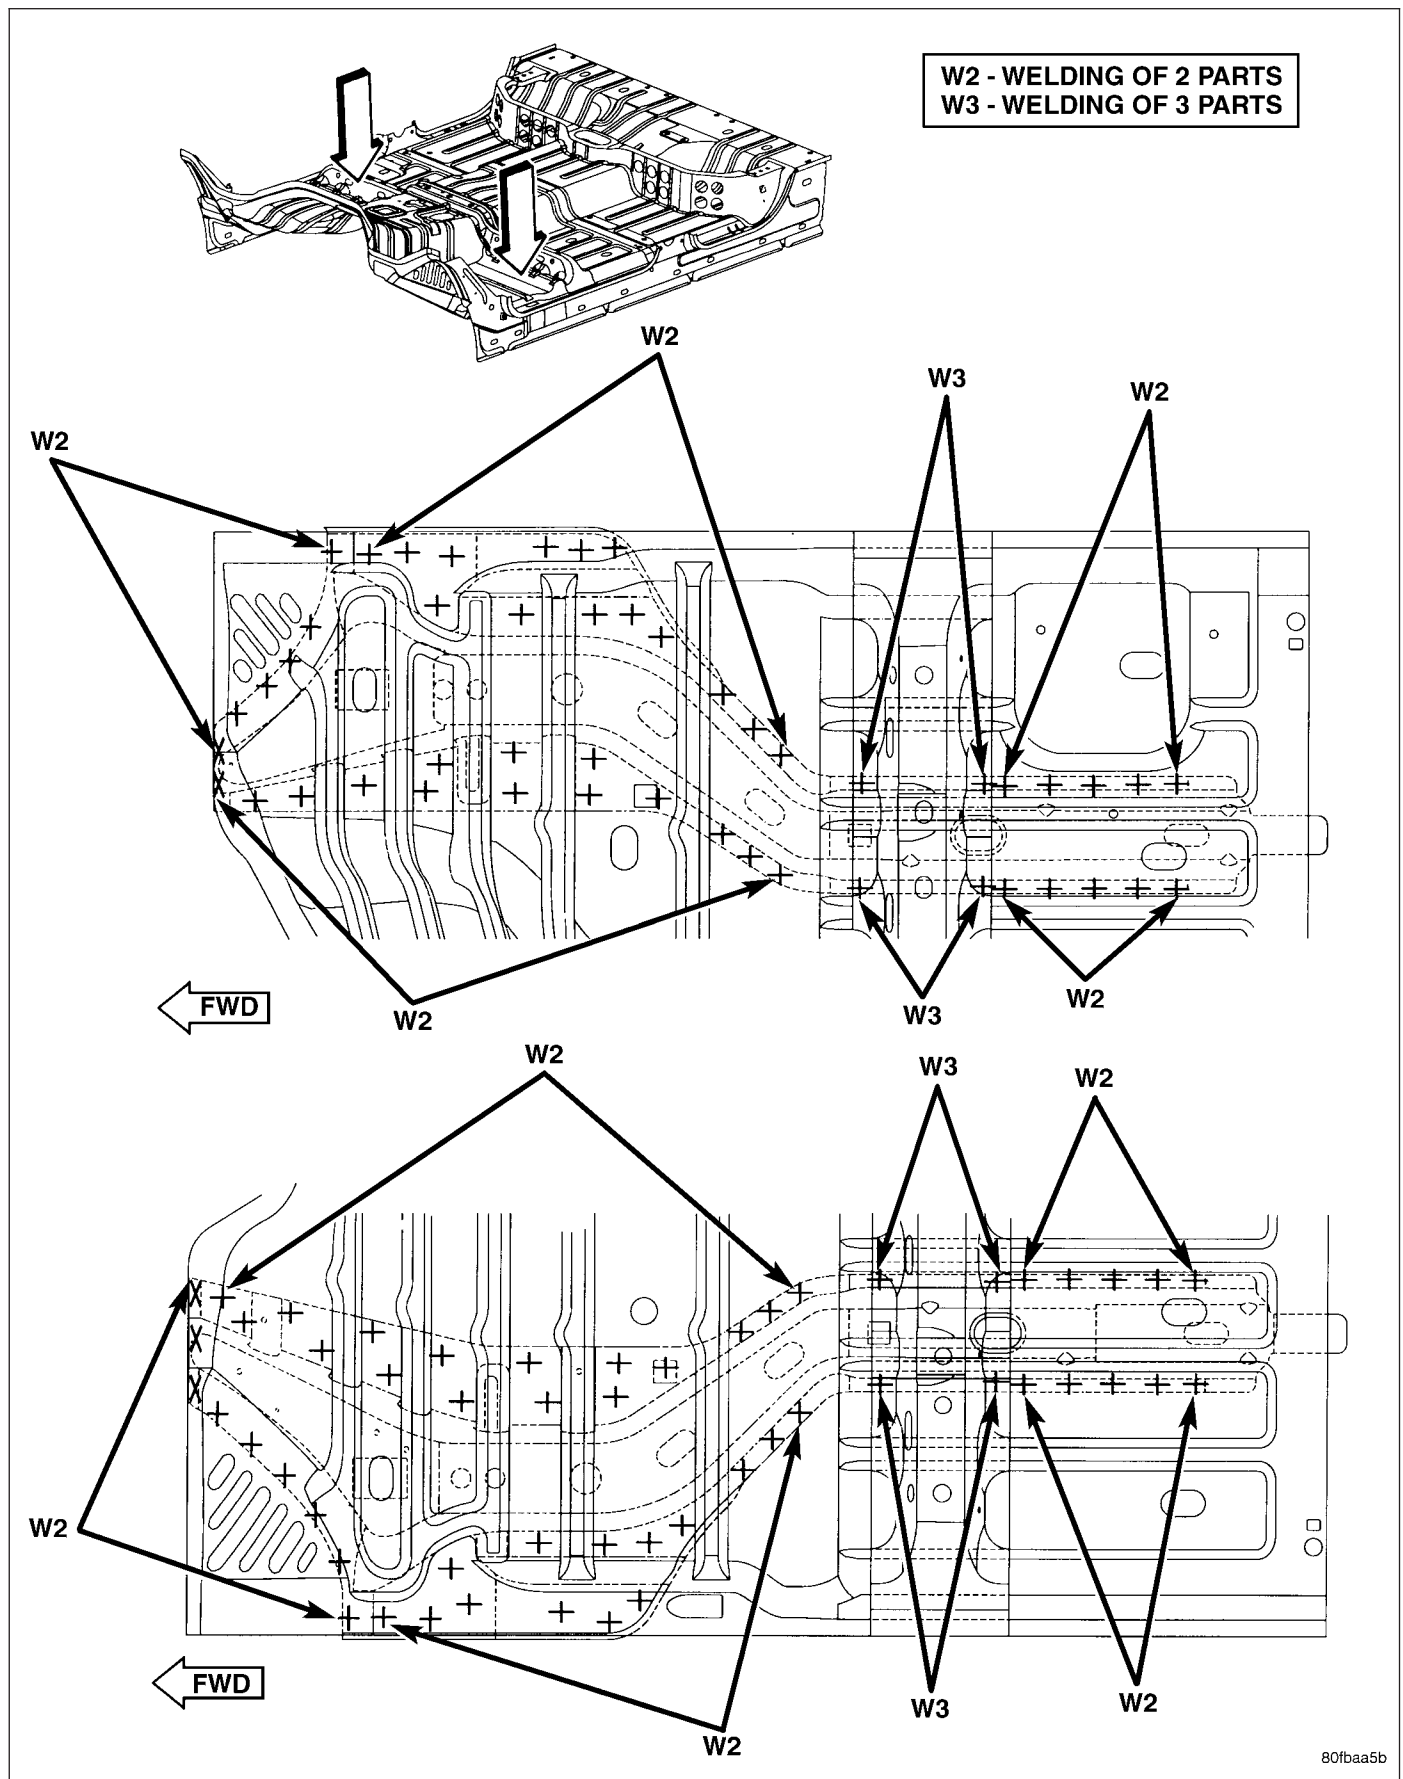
FRONT SEAT MOUNTING FRONT CROSSMEMBER
